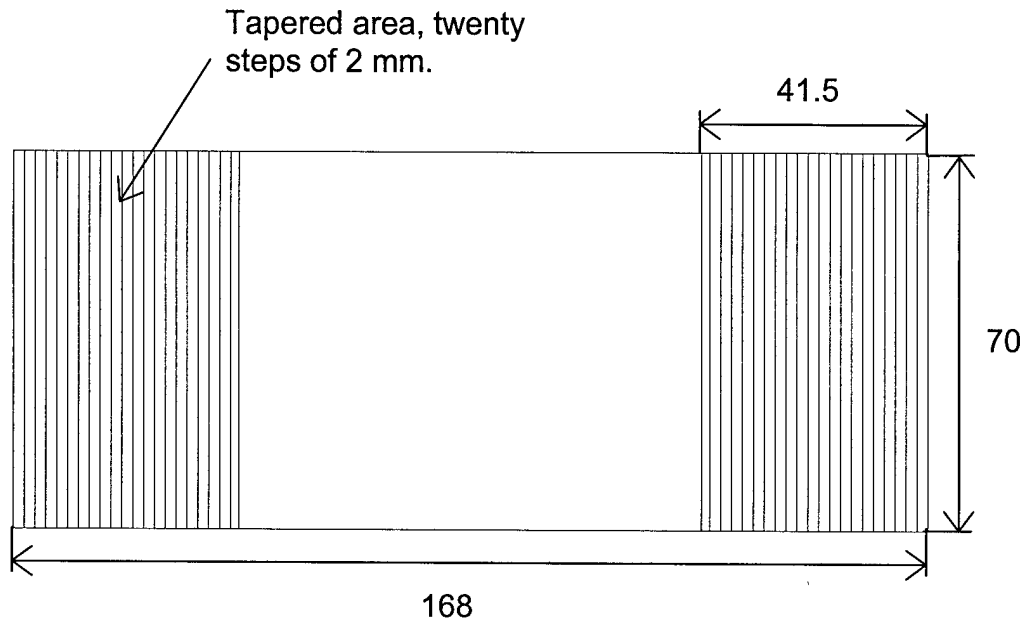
Glare2 8/7 0.3 patch for skin side (all dimensions in mm).
